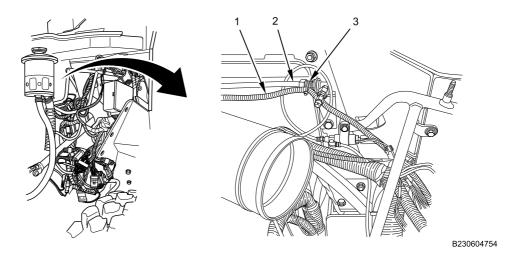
PDC Harness Breakout Cable Lock Strap Removal.
